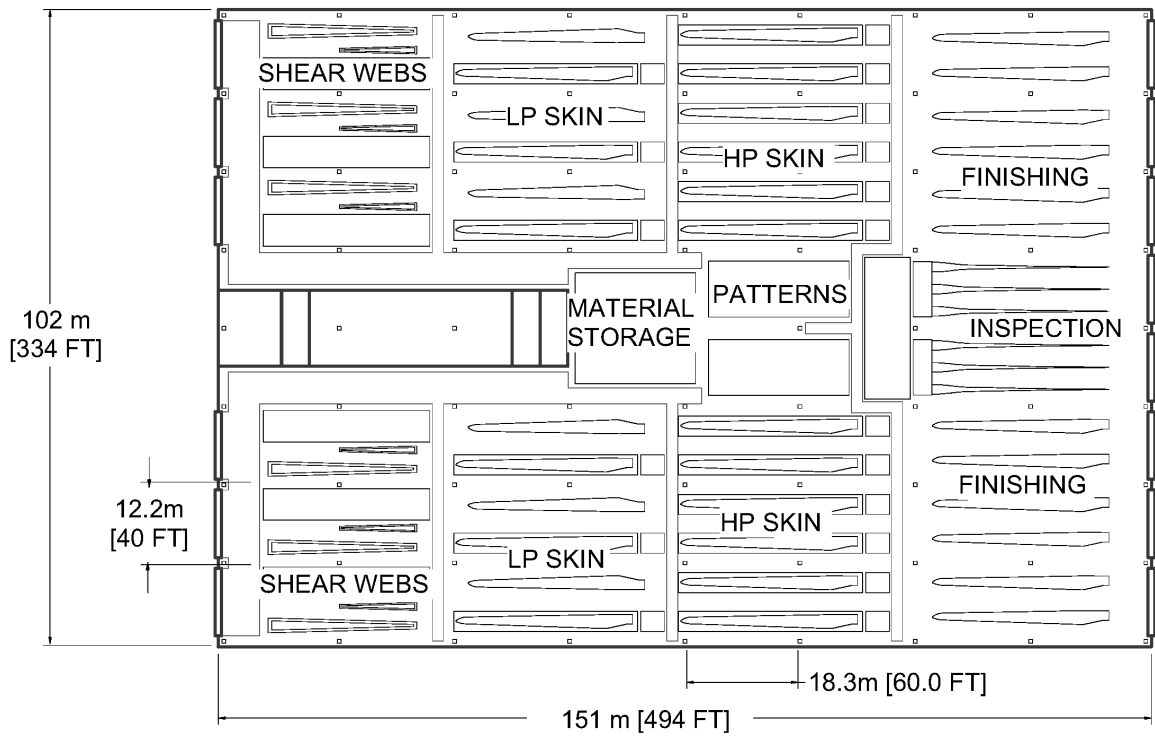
30 Meter Blade Manufacturing Plant Conceptual Layout
